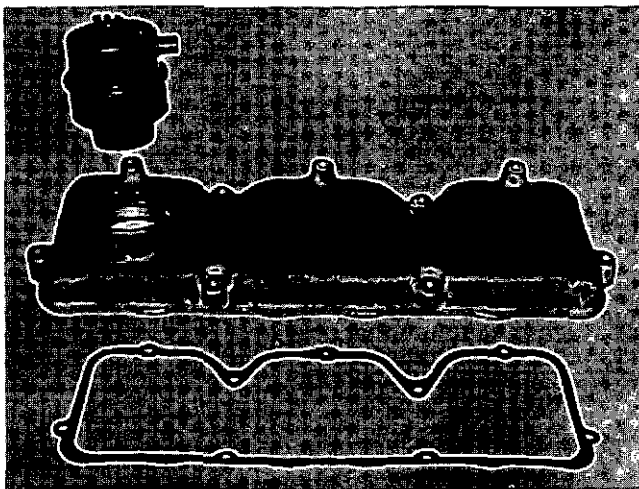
, V40308. Rocker lever cover assembly (breather type)
